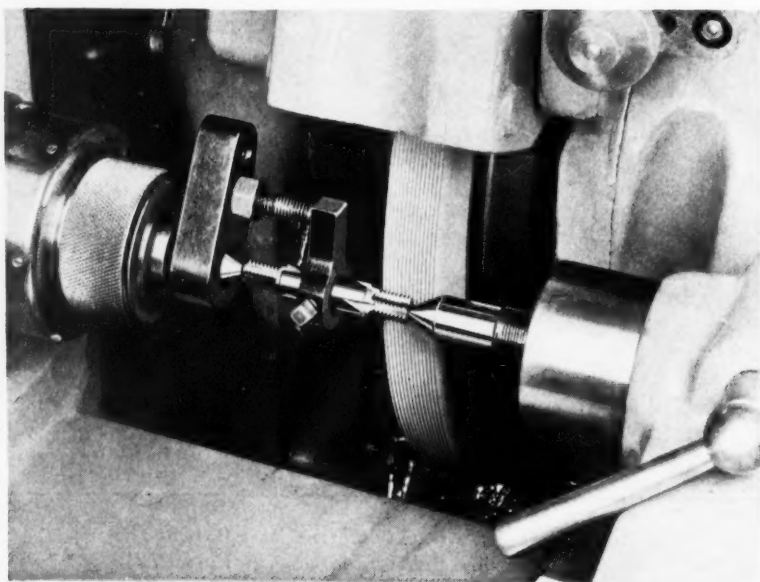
Grinding the Threads of an Internal Thread Milling Cutter with a Multiple-thread Wheel
